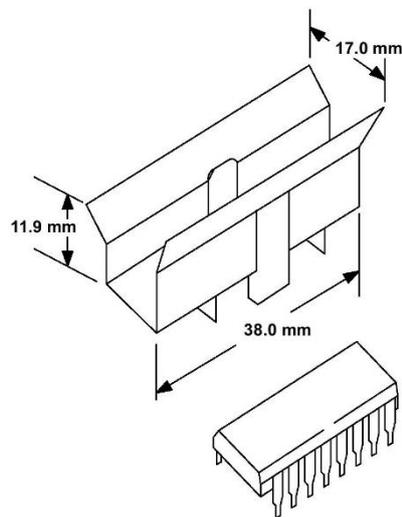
External Heat Sink Mounting Example ($\theta_{JA} = 25^\circ\text{C/W}$)
